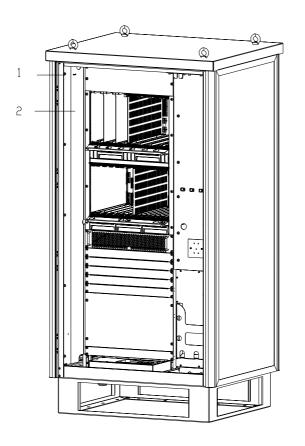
WINDSHIELD COVER BOARD INSTALLATION
